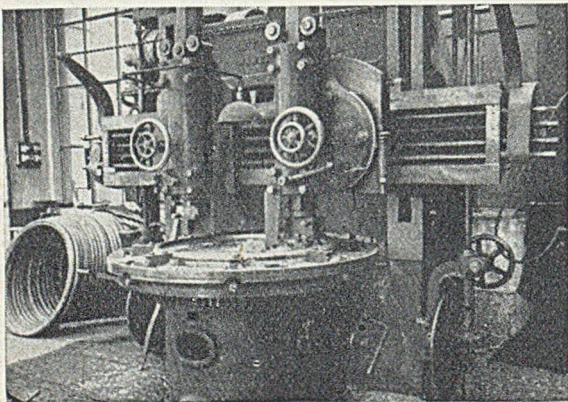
Trimming the Casting on a Horizontal Lathe to remove the Sink Head.
